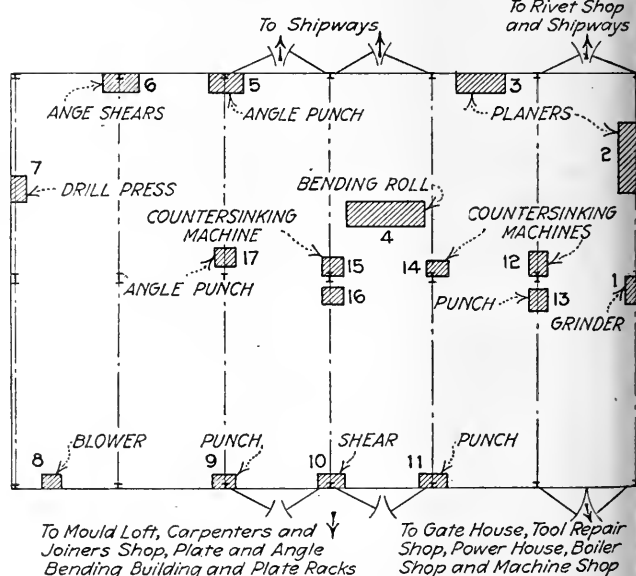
LAYOUT OF MACHINES IN PLATE SHOP
